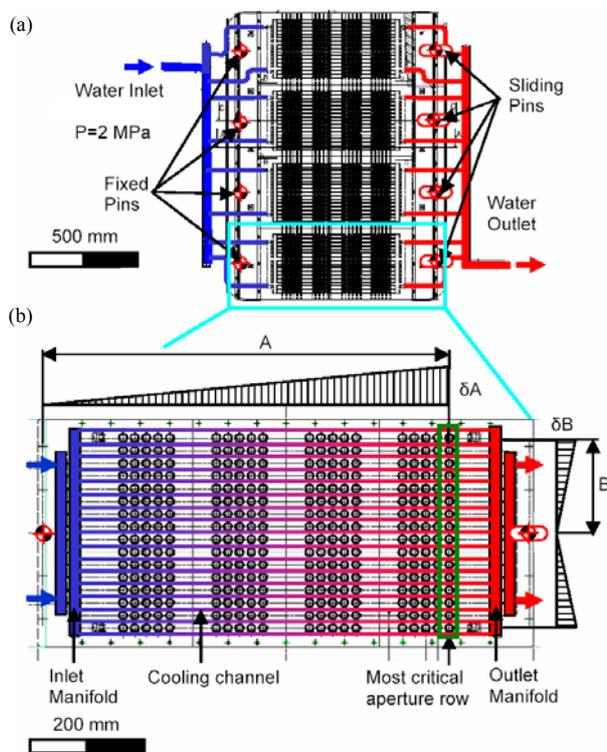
PG, EG and PAG cooling and positioning scheme: (a) Whole grid; (b) Segment
